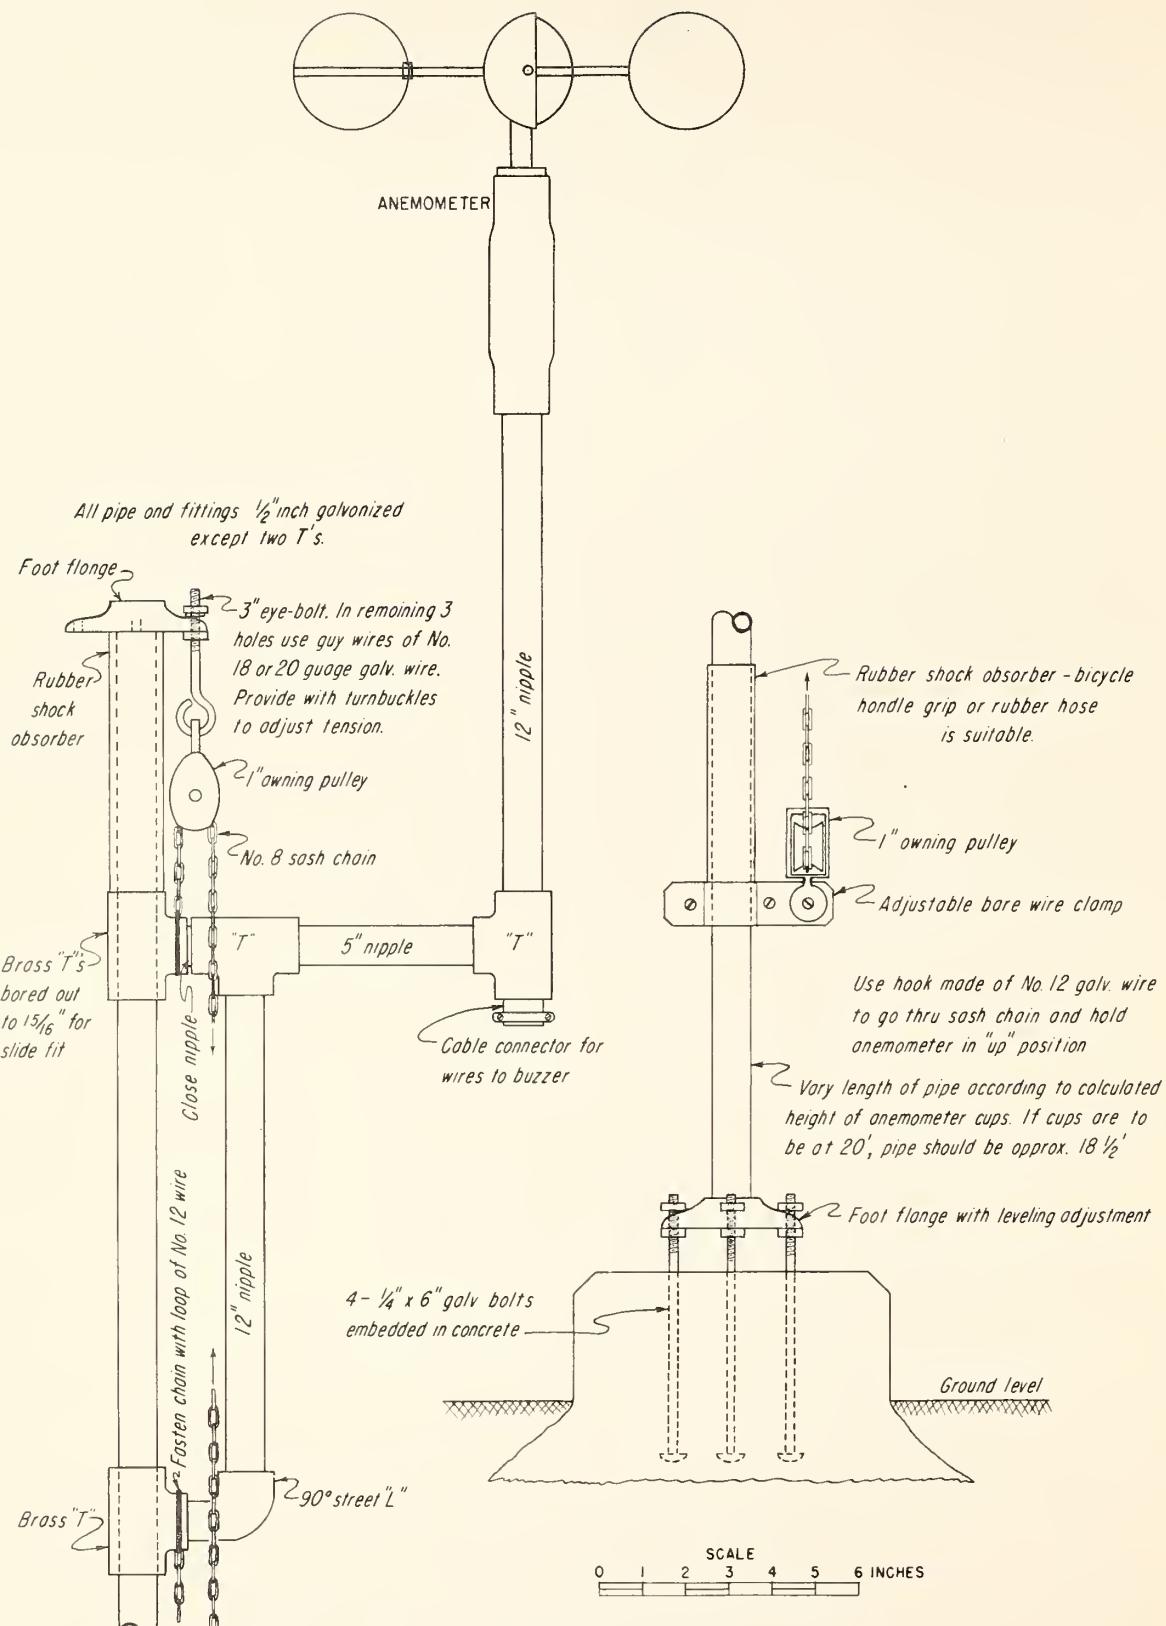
A suggested anemometer mast and mounting. Instrument may readily be lowered, and is easily pulled up in position after servicing.
